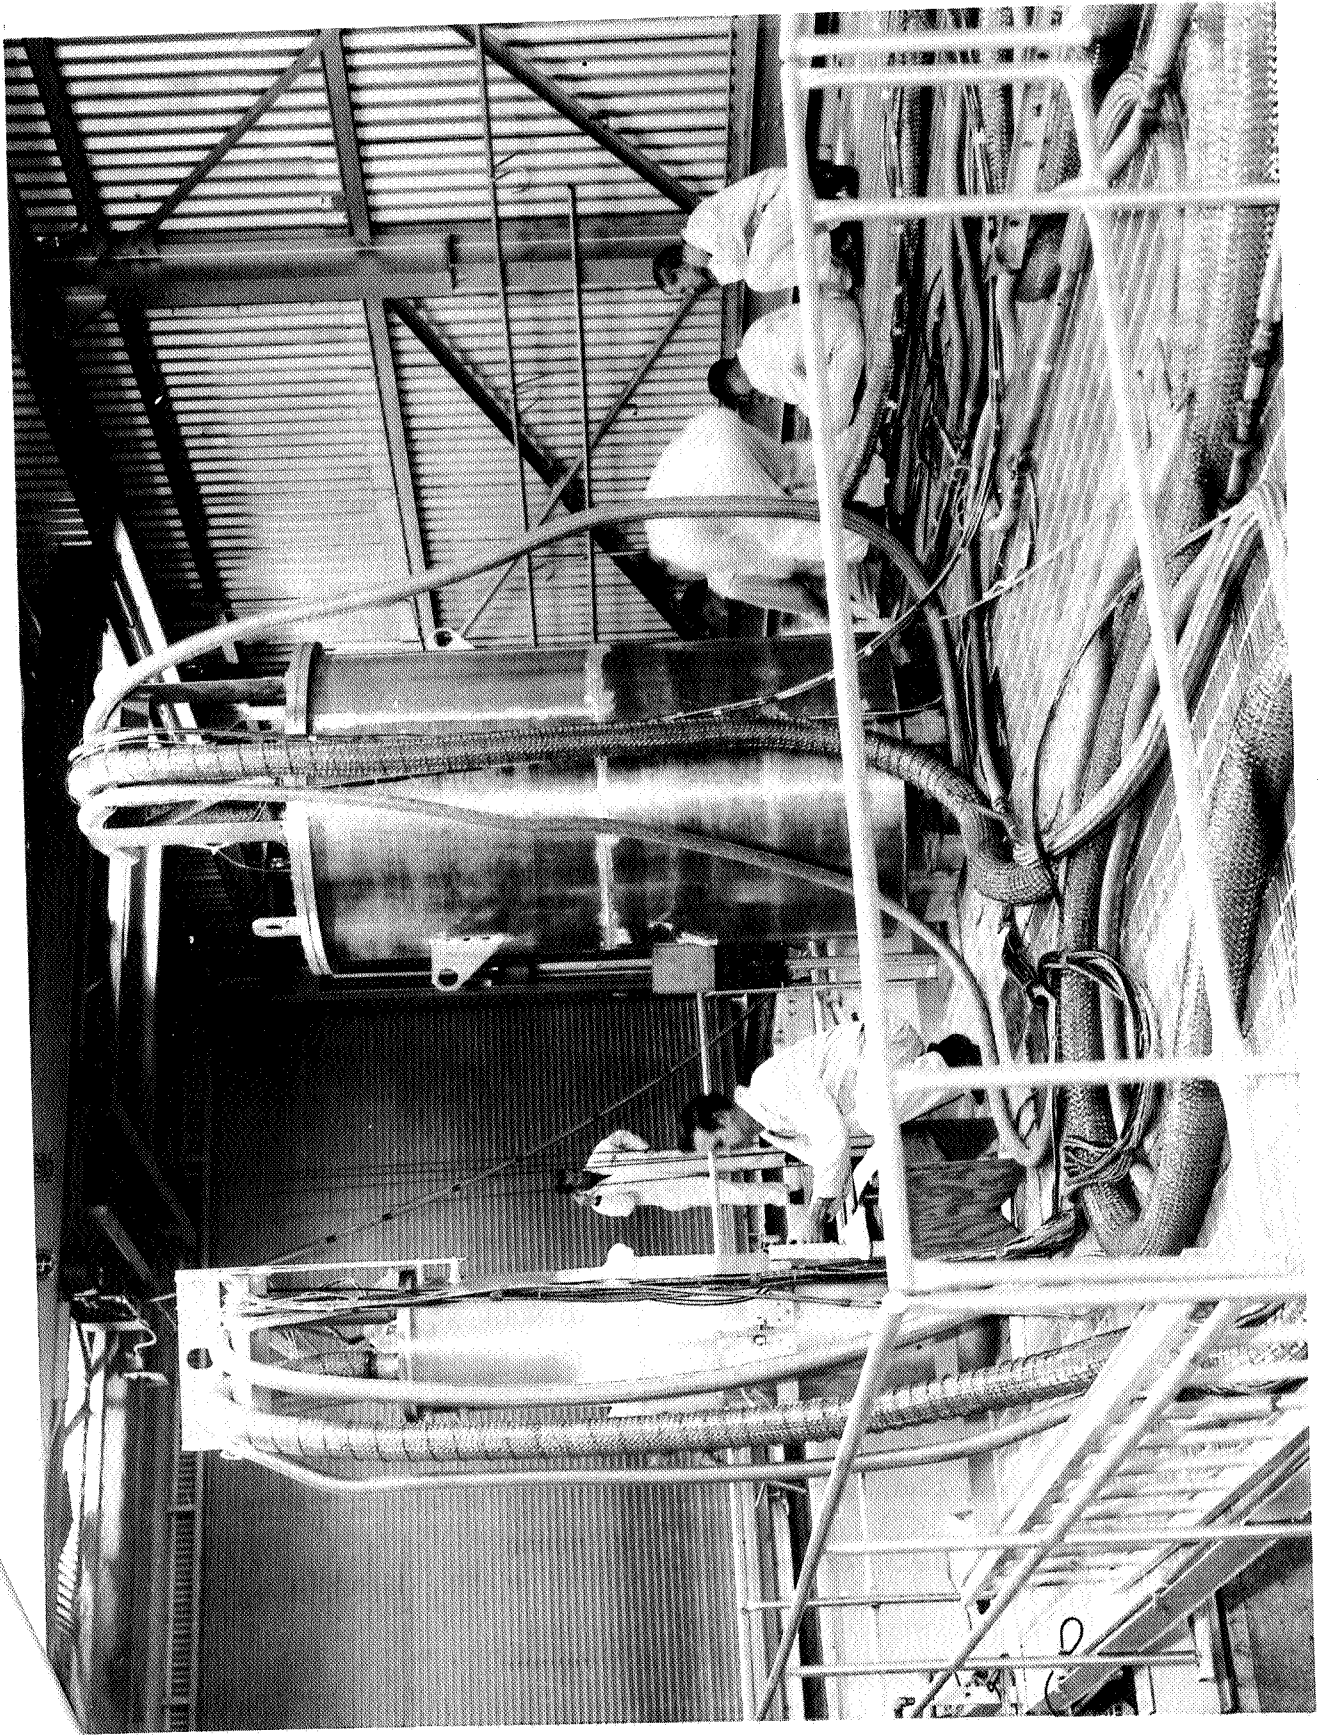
17-Inch-Valve Assembly Ready for Installation in the Irradiation Cell
